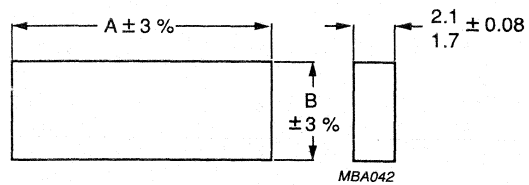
Rectangular outline, 265 V ceramic; see Table 1 for dimensions.
